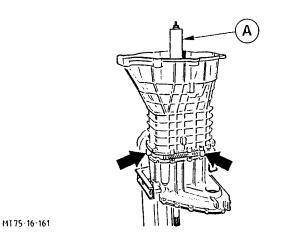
Front transmission housing supported on transfer box with spacer sleeves.
